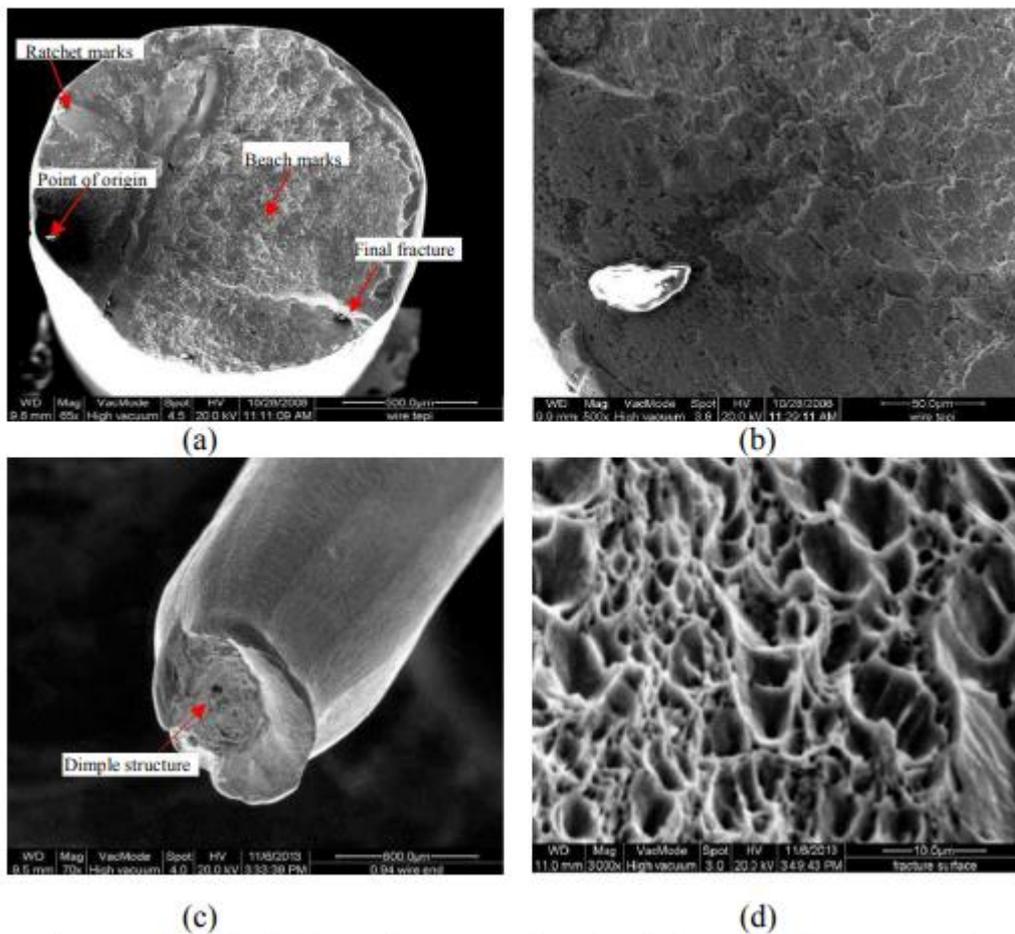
a) fatigue fracture surface; b) fatigue striations; c) cup of cup and cone fracture; d) zoomed in image showing dimple morphology [134]
